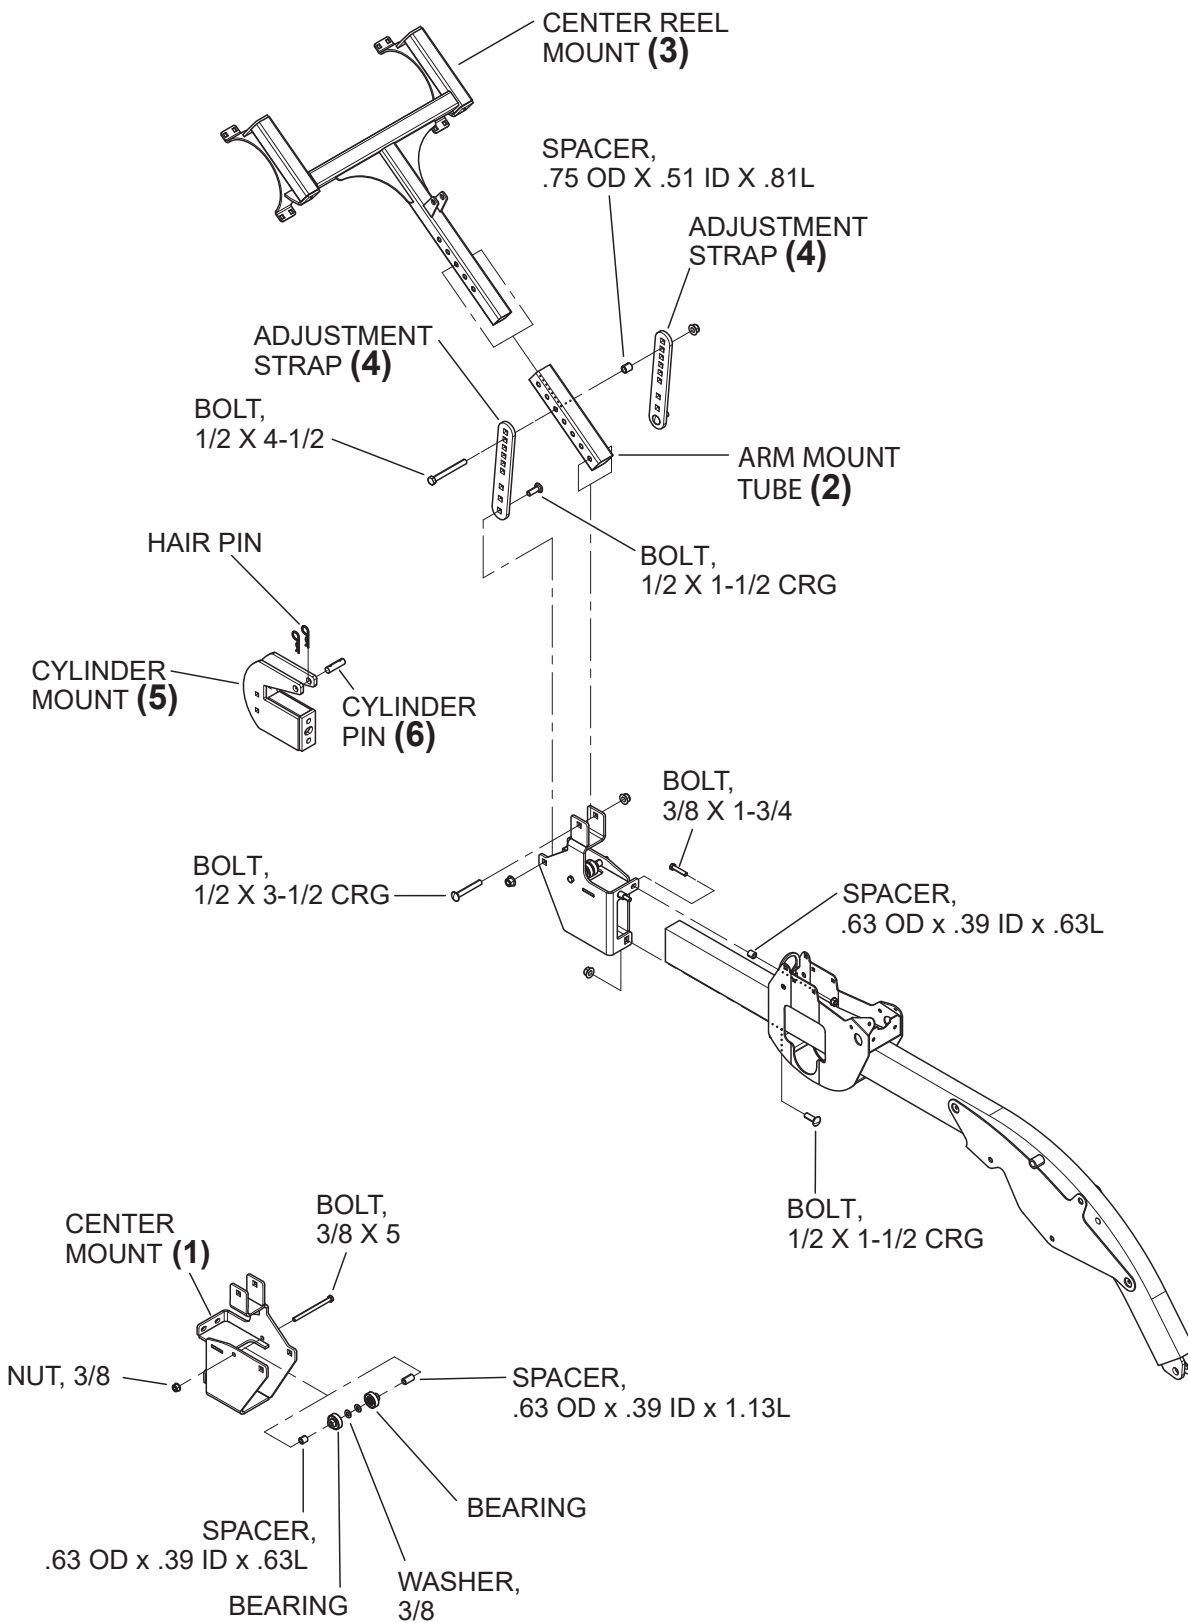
Center reel arm mount assembly (FD70 & CIH 2162 headers)
